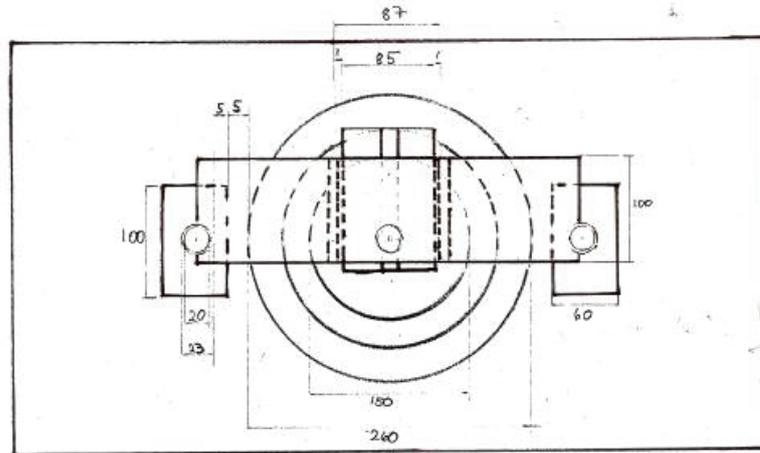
SCHEMATIC TOP VIEW OF THE MOUNTING FRAME DESIGN FOR THE KANGO®
